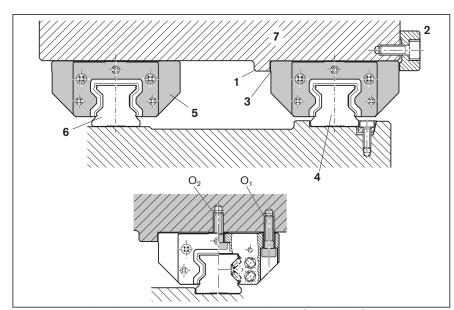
Fastening the attachment to the runner blocks (Scenario 3)
